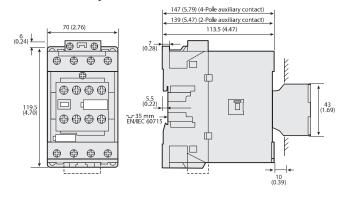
100-E40...100-E52 4-Pole Contactors with Sidemounted Auxiliary Contact
